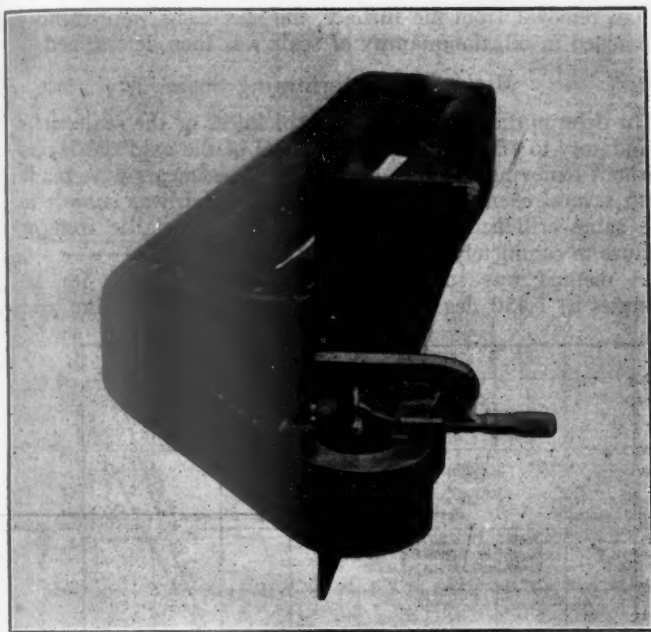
Gage for Checking Roundness, and Measuring Size of Holes
